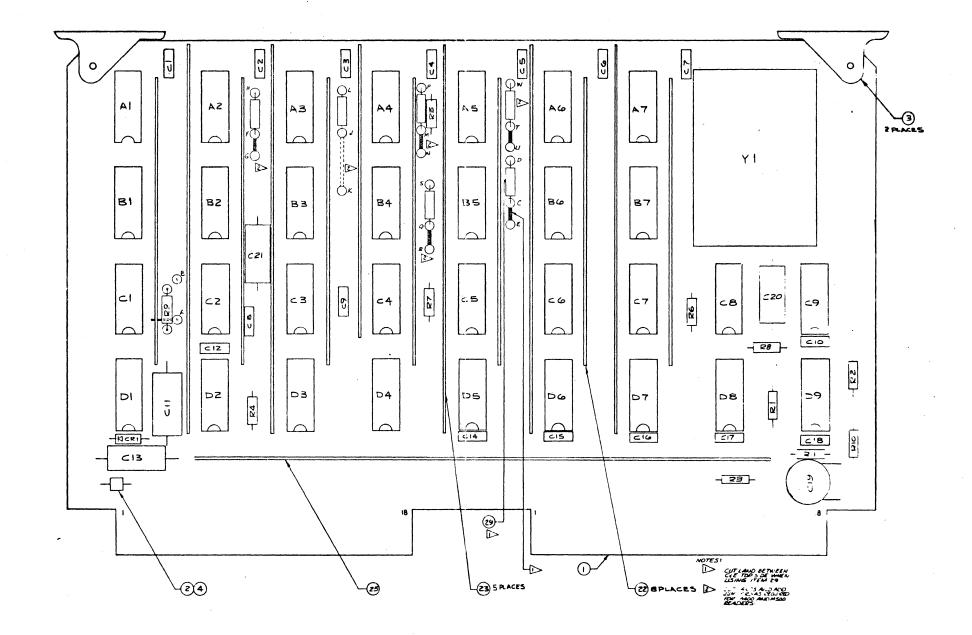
Assembly Diagram, Clock Card (Dwg. No. 1040765
